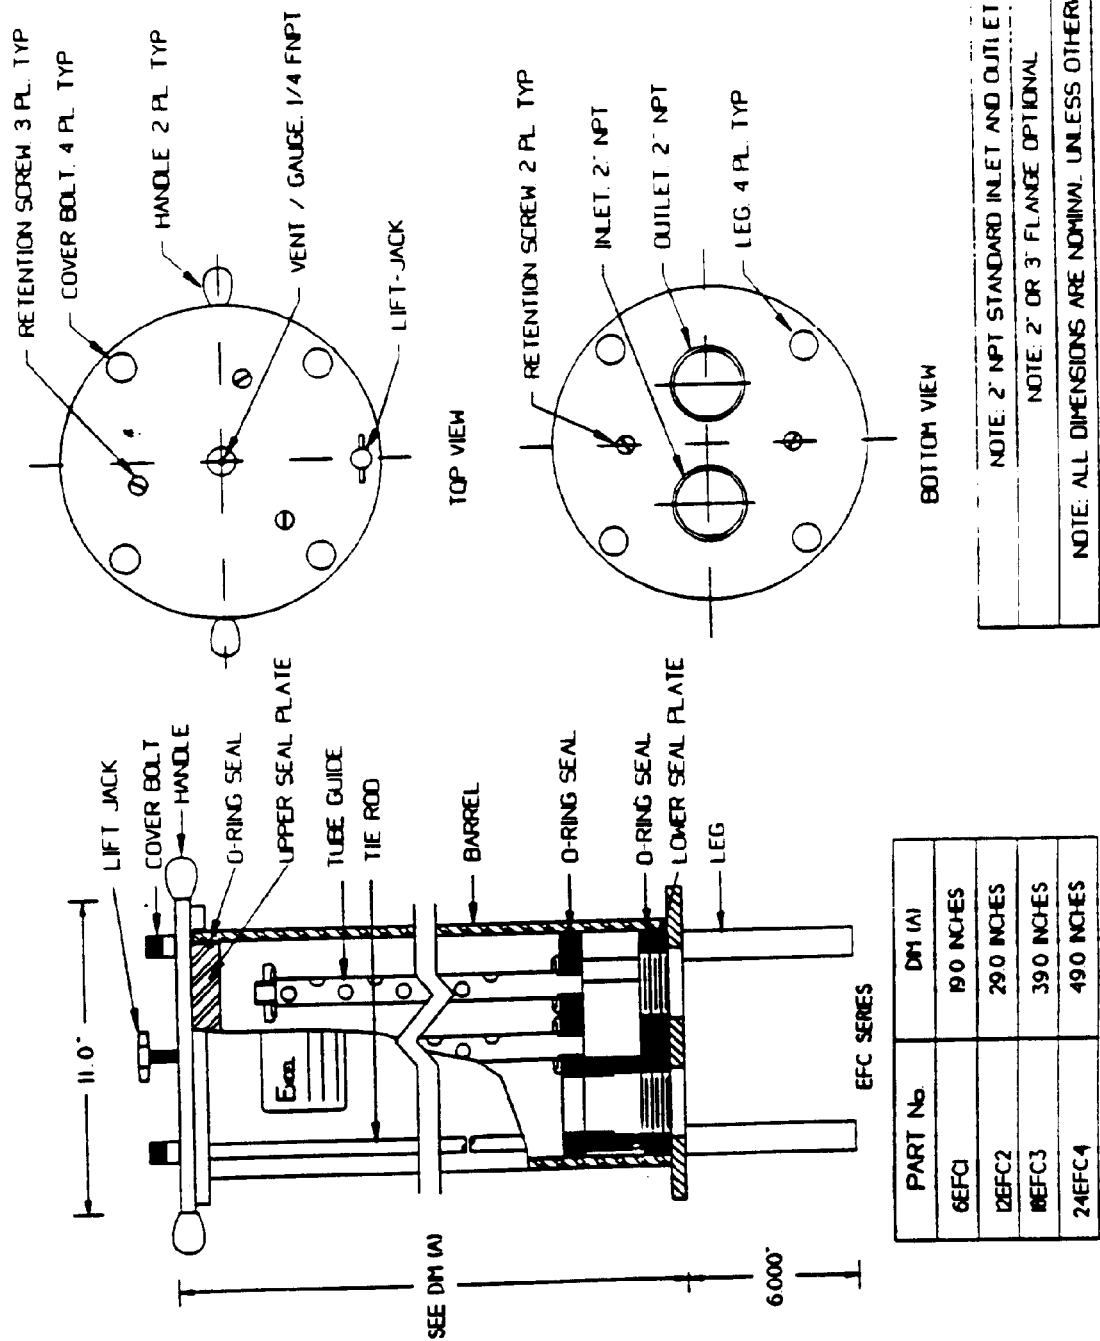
TYPICAL CROSS SECTION OF MULTI ELEMENT CARTRIDGE FILTER HOUSING.
